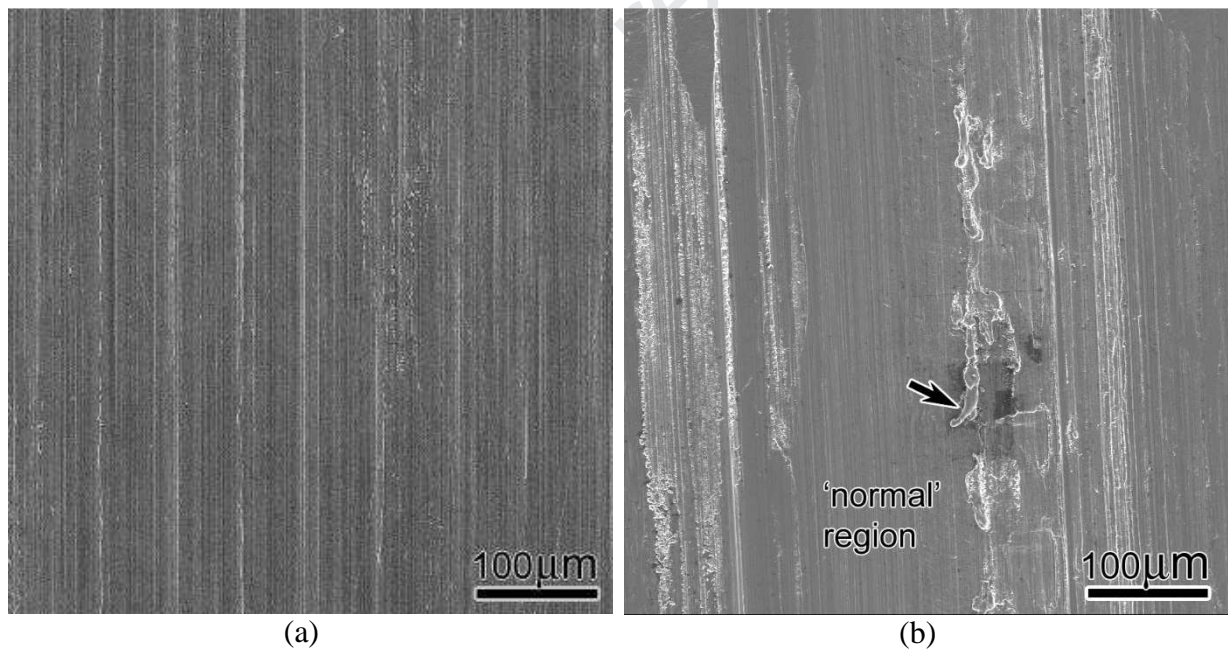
SEM images taken from the surfaces of the (a) slightly damaged and (b) damaged specimens, showing machining marks and defects (arrowed in fig. 3b).
